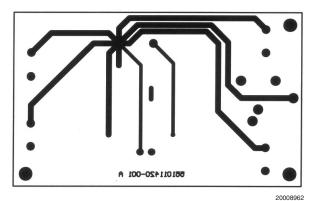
Recommended PC Board Layout Bottom-Side Layout
